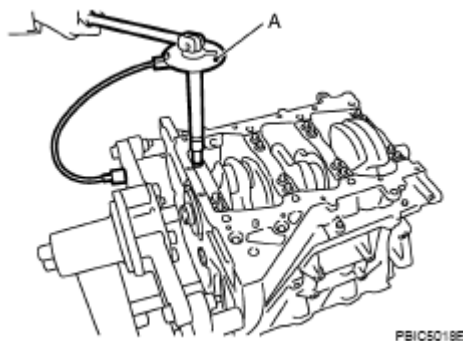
Checking Cylinder Block Bolts Tightening Angle
